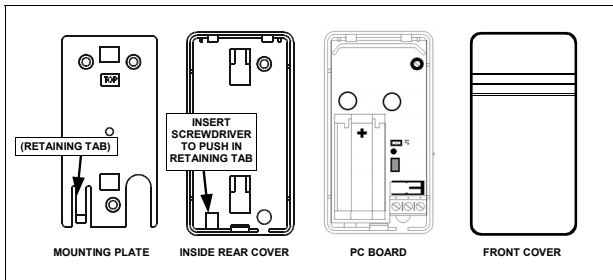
F-LTRANS Wireless Transmitter Component Parts
